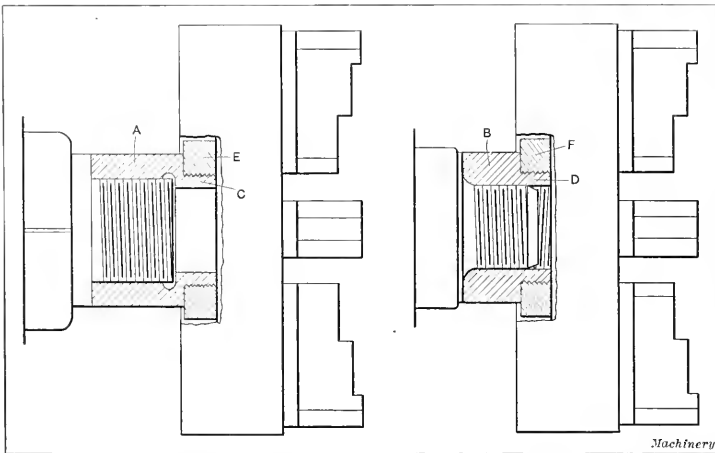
Two Styles of Lathe Spindle with Standard Chuck mounted on them
